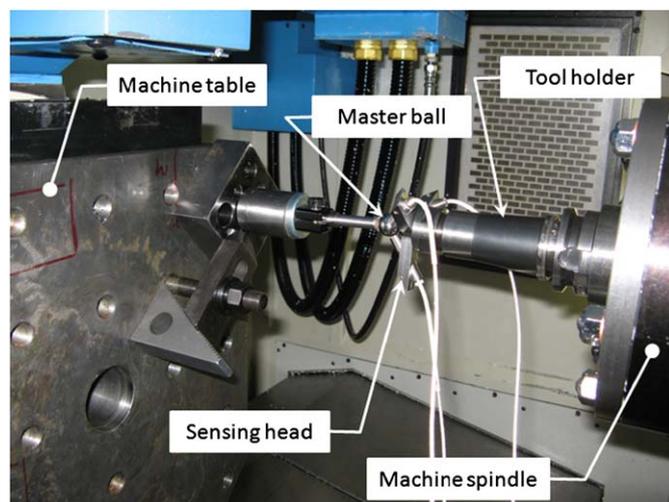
Functional prototype consisting of a sensing head equipped with three capacitive sensors mounted at the tool holder and a master ball mounted on the machine table.
